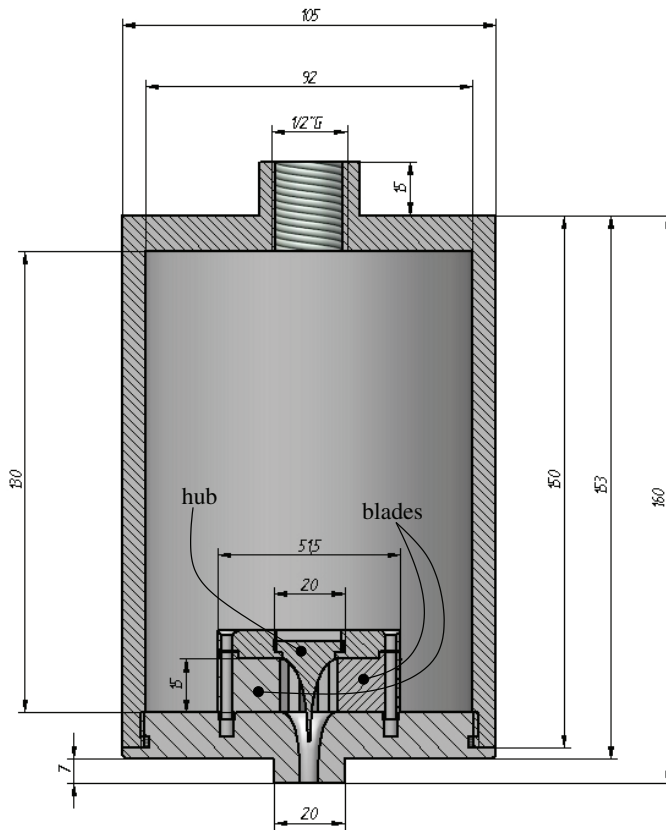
2D view of the nozzle. The dimensions are in mm.
